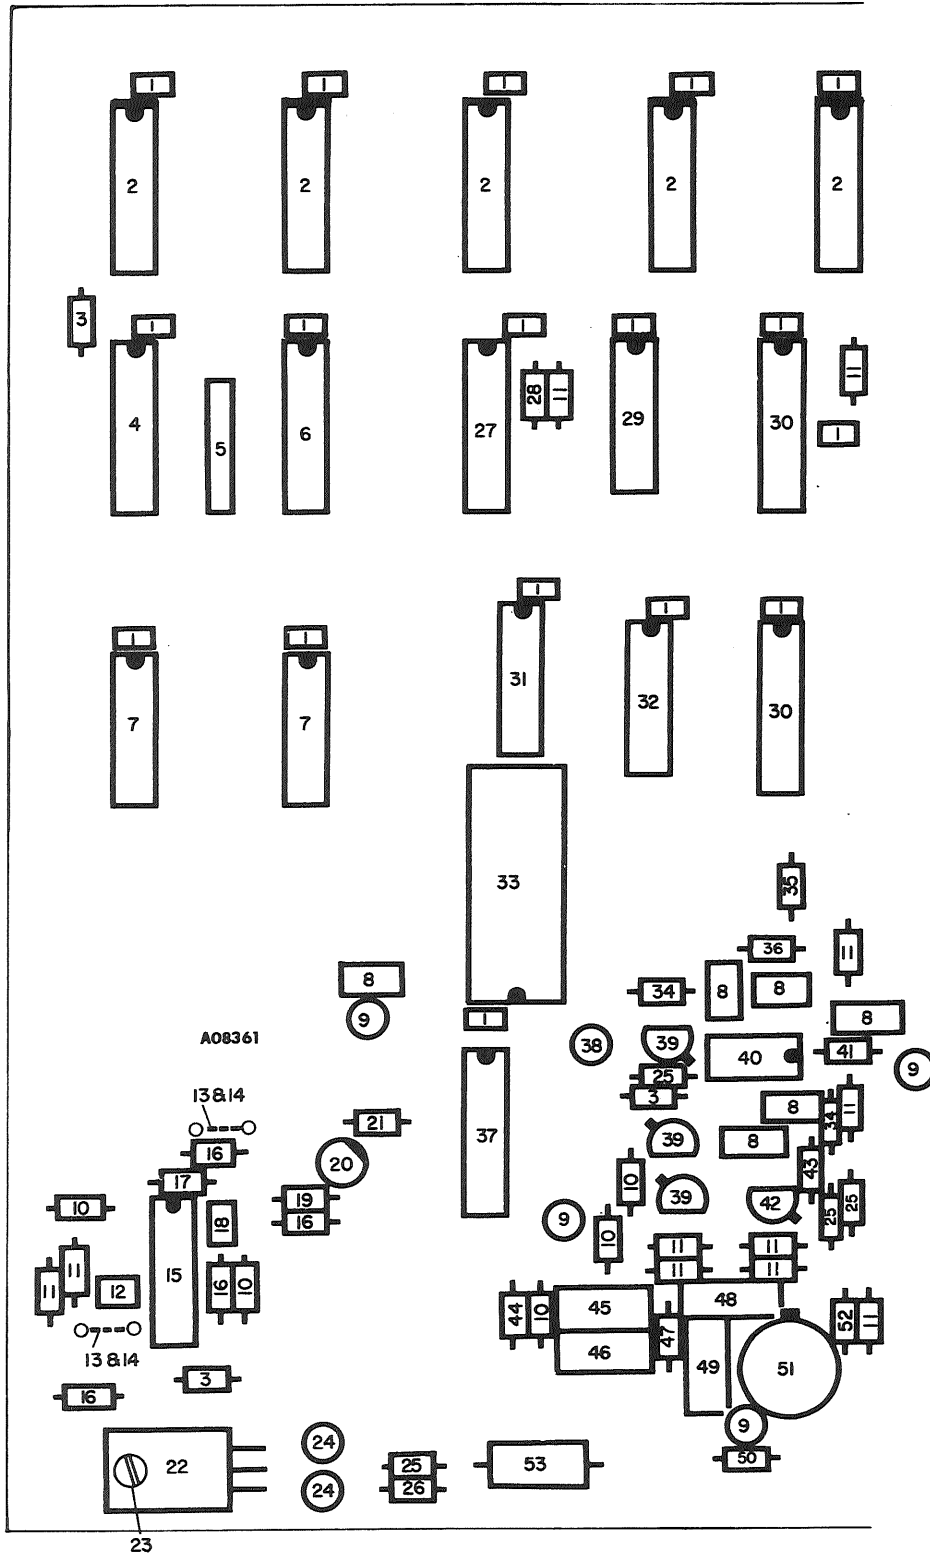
First L.O. Synthesizer Assembly, Circuit Card, A7 (Sheet 1 of 2)
